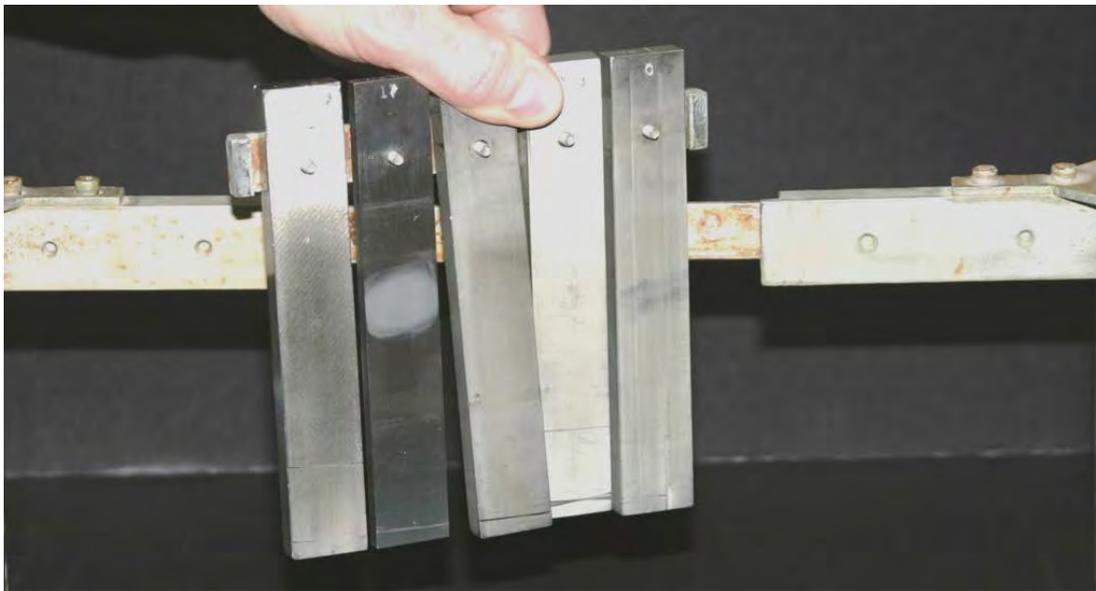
FPI Wash-Fixture Removable Holder for Fatigue-Crack Specimens
